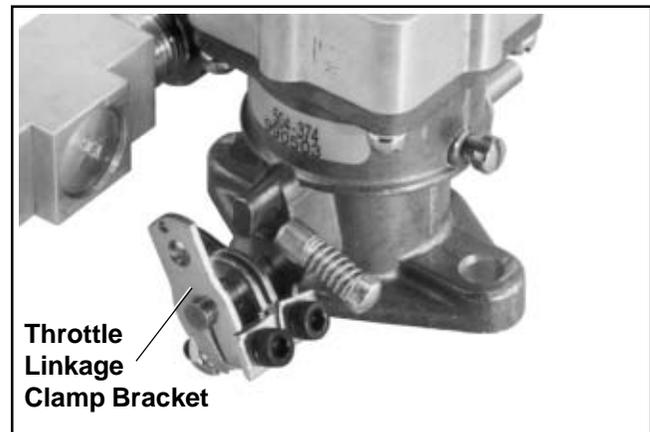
A-13. Throttle Linkage Clamp Bracket Position.
